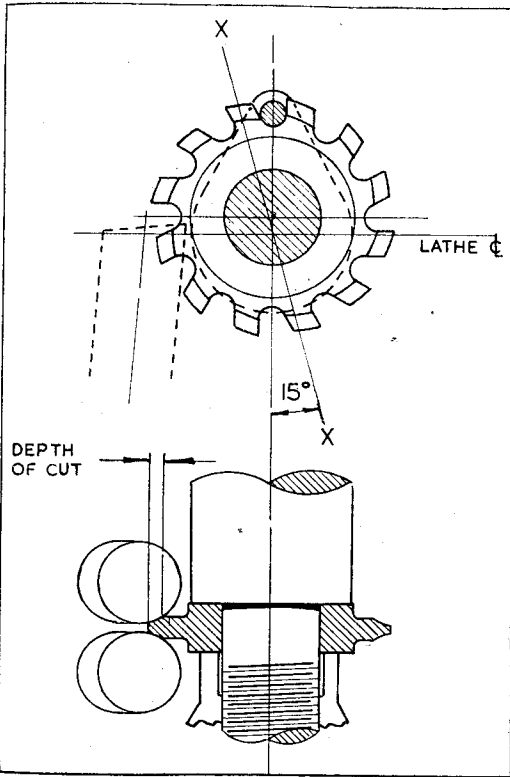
View showing mounting of cutter and relation to forming pins. Note axis XX coincides with axis XX in linkage view
